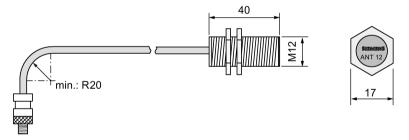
Dimension drawing ANT 12 (all values in mm)
